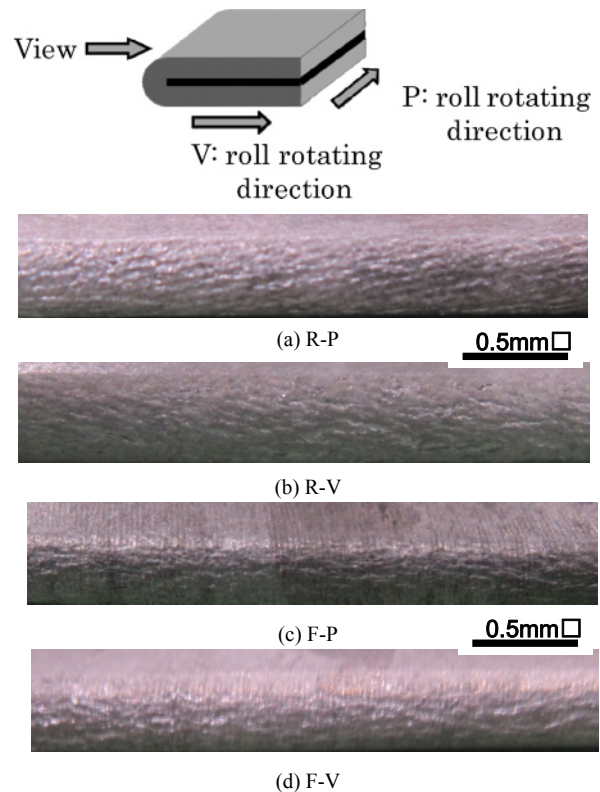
Result of the 180 degrees bending test. "R" shows that roll contact surface was outer surface. "F" shows that free solidified surface was outer surface. "P" shows that bending direction was parallel to the casting direction. "V" shows that bending direction was vertical to the casting direction. The as-cast strip was cold rolled down to 1mm and was water cooled after keeping at 430°C for 1 h.
